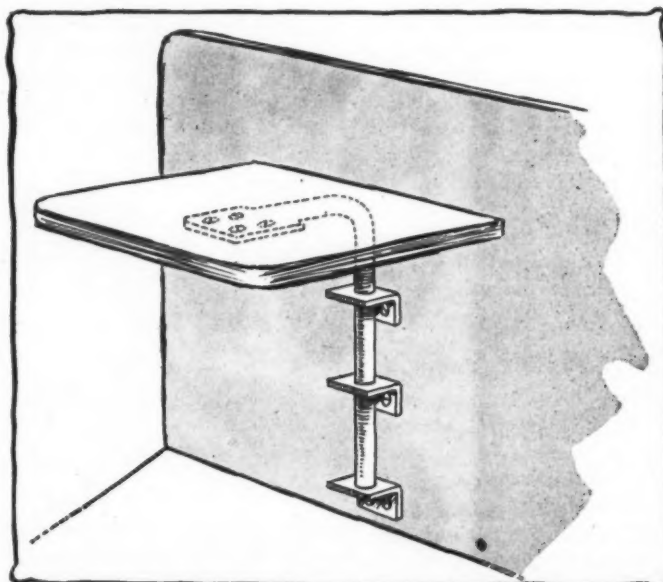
Method of attaching removable home-made seat for child. Bracket is tapered or stepped
